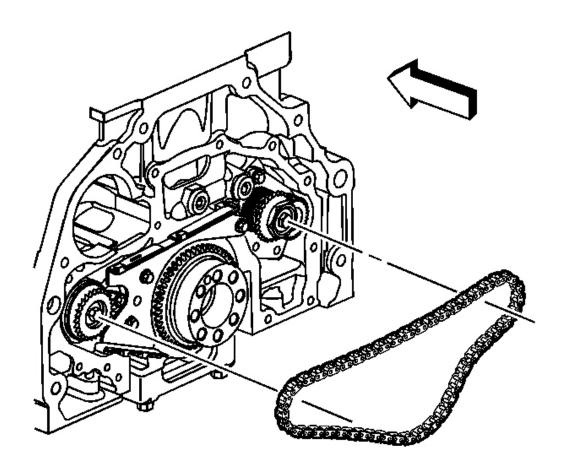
View Of Balance Shaft Drive Chain Courtesy of GENERAL MOTORS CORP.
